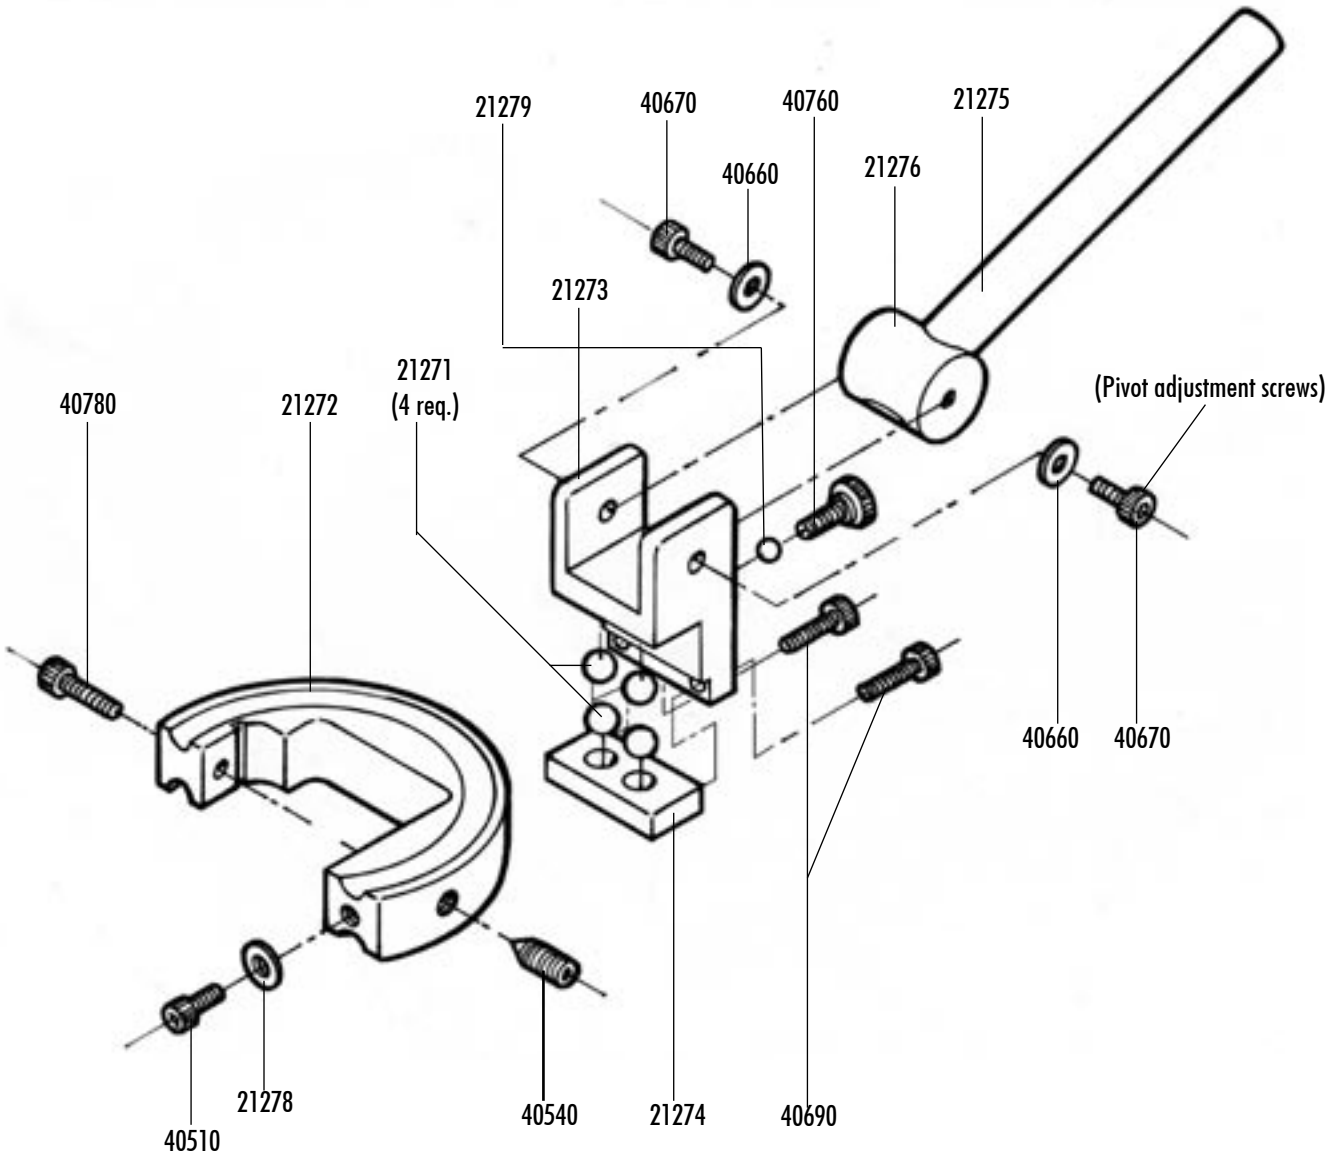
Component parts of the microscope when mounted to a Sherline mill.
